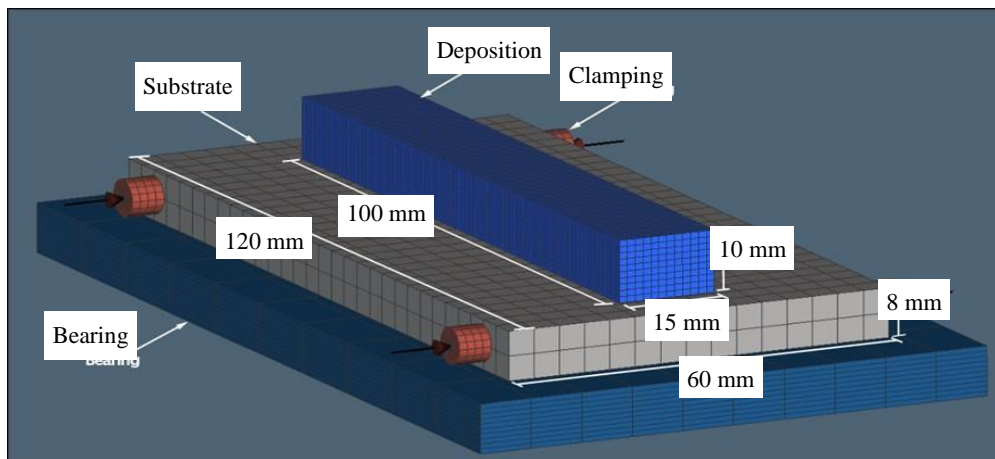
Geometrical model with dimensions and mechanical boundary conditions of the LMD process.
